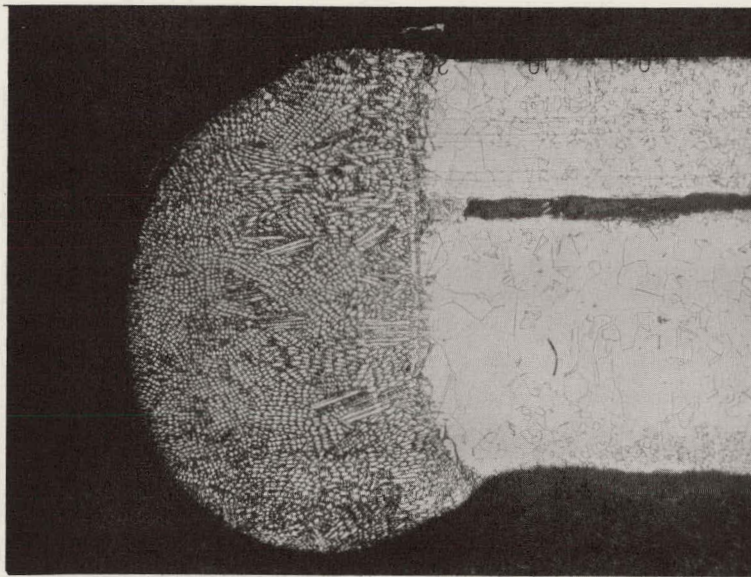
Cup Type End Cap Weld with Chill.
